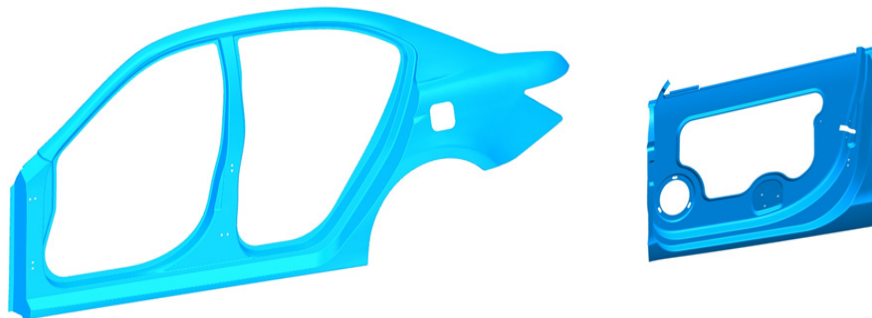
Typical parts, Body Side outer panel and Door Inner panel that would be stamped using a transfer press line.
